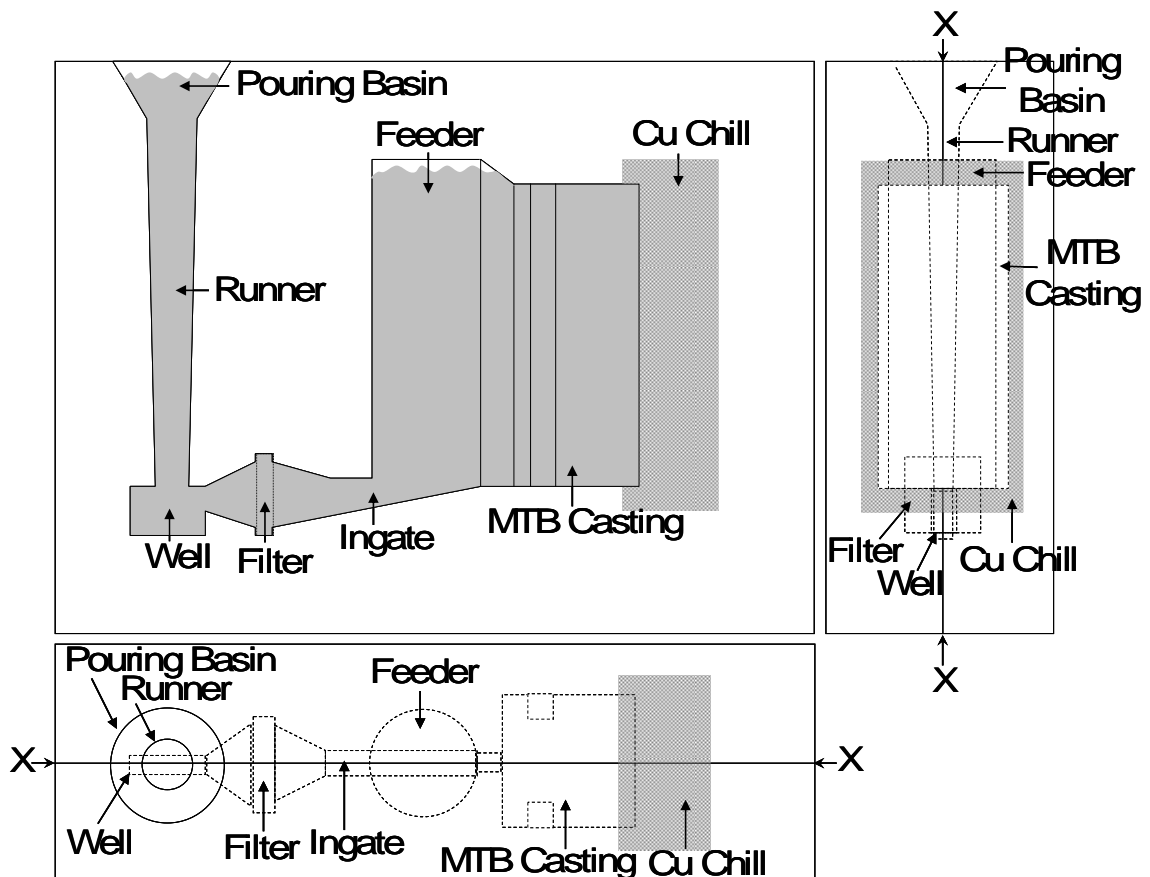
The Machining Test Block (MTB) mold design indicating the mold side cross-section, front view, and top view. The MTB itself is located adjacent to the Cu chill. Its dimensions are: height = 250mm; width = 100mm; depth = 100mm.
